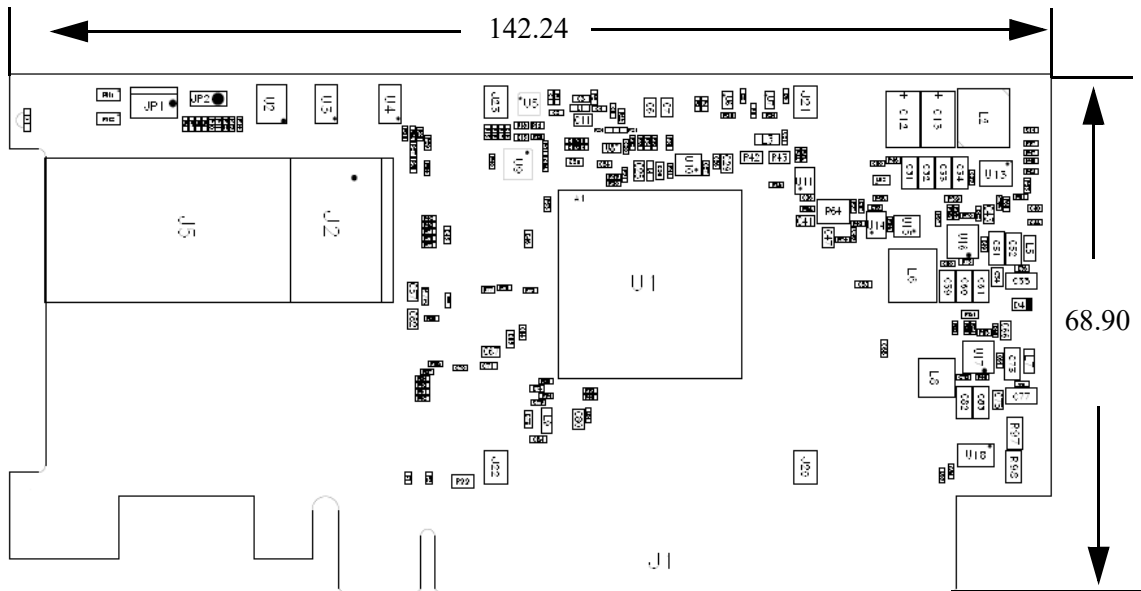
Mechanical Drawing of the Single-port x8 Adapter Cards
